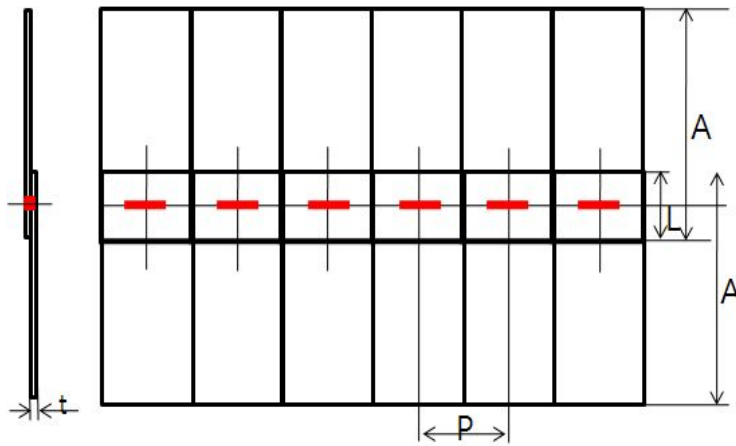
Nd:YAG Laser Stitch welded specimen geometry in Pitch-Size
